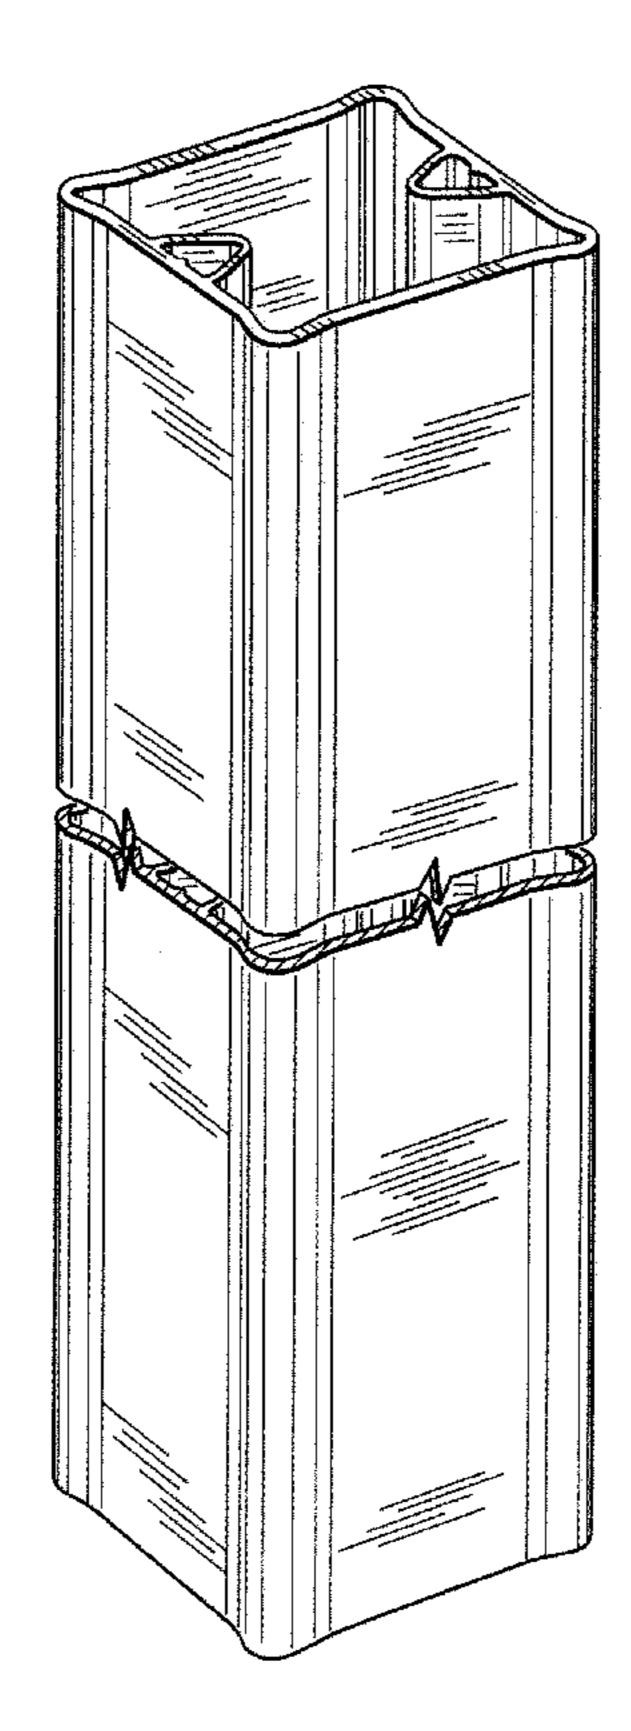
is a bottom front perspective view of the baluster of FIG. 1;
